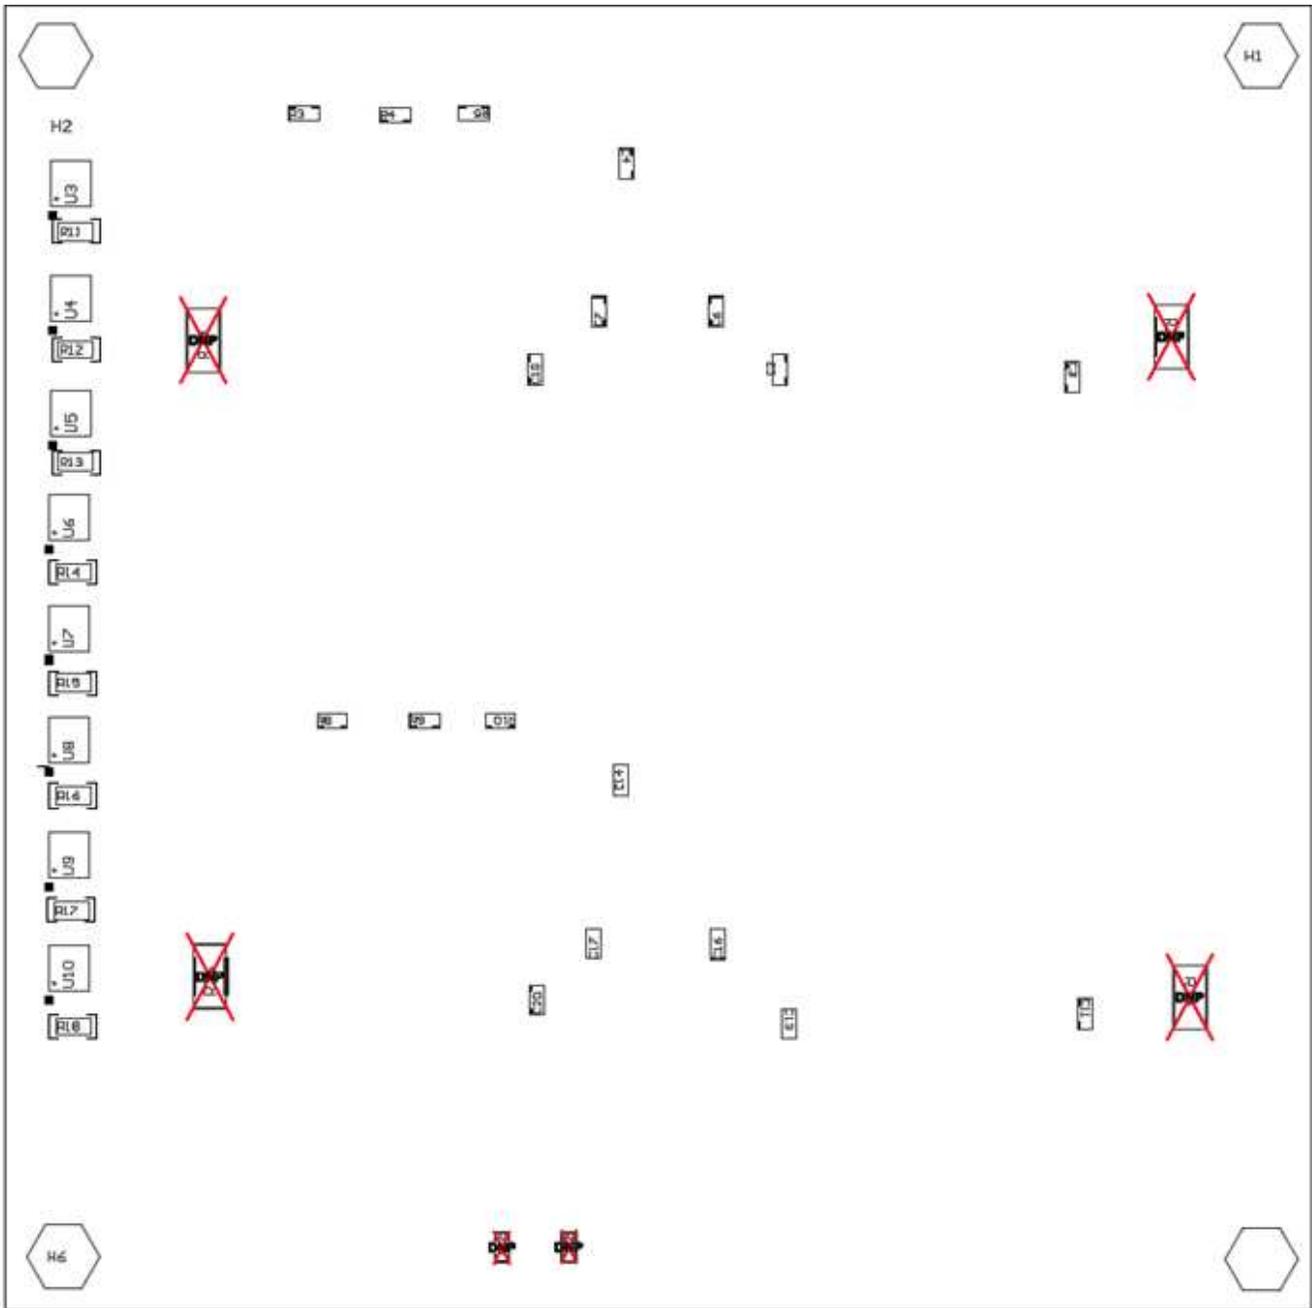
I²C Load Switch EVM Board Bottom Assembly
